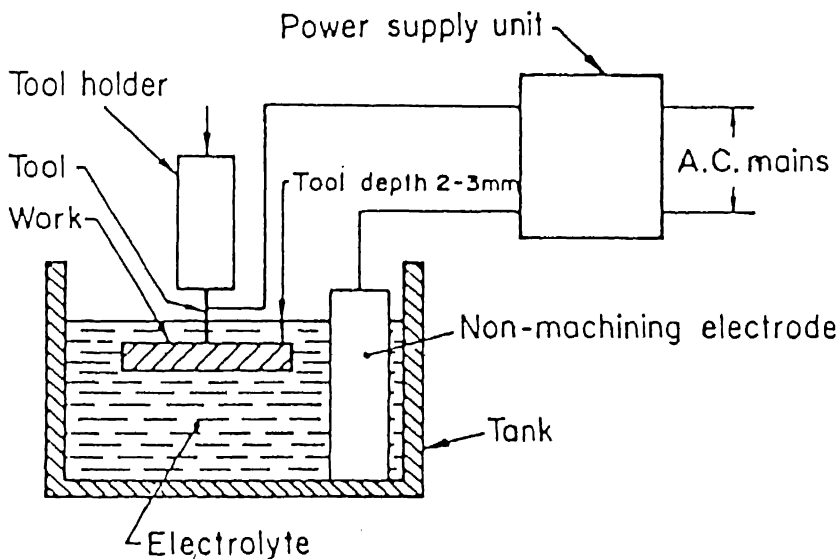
Configuration of non conducting work piece machining using ECSM [3]
